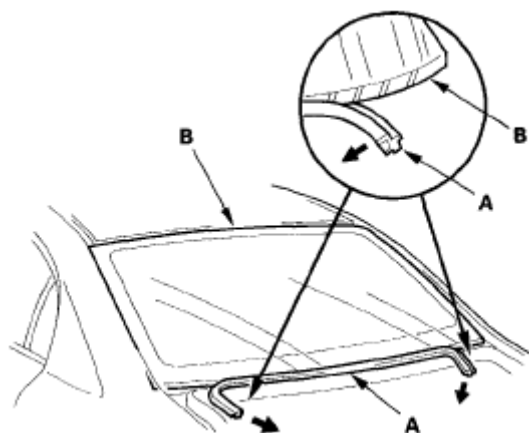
Removing Lower Rubber Dam From Lower Edge Of Rear Window
